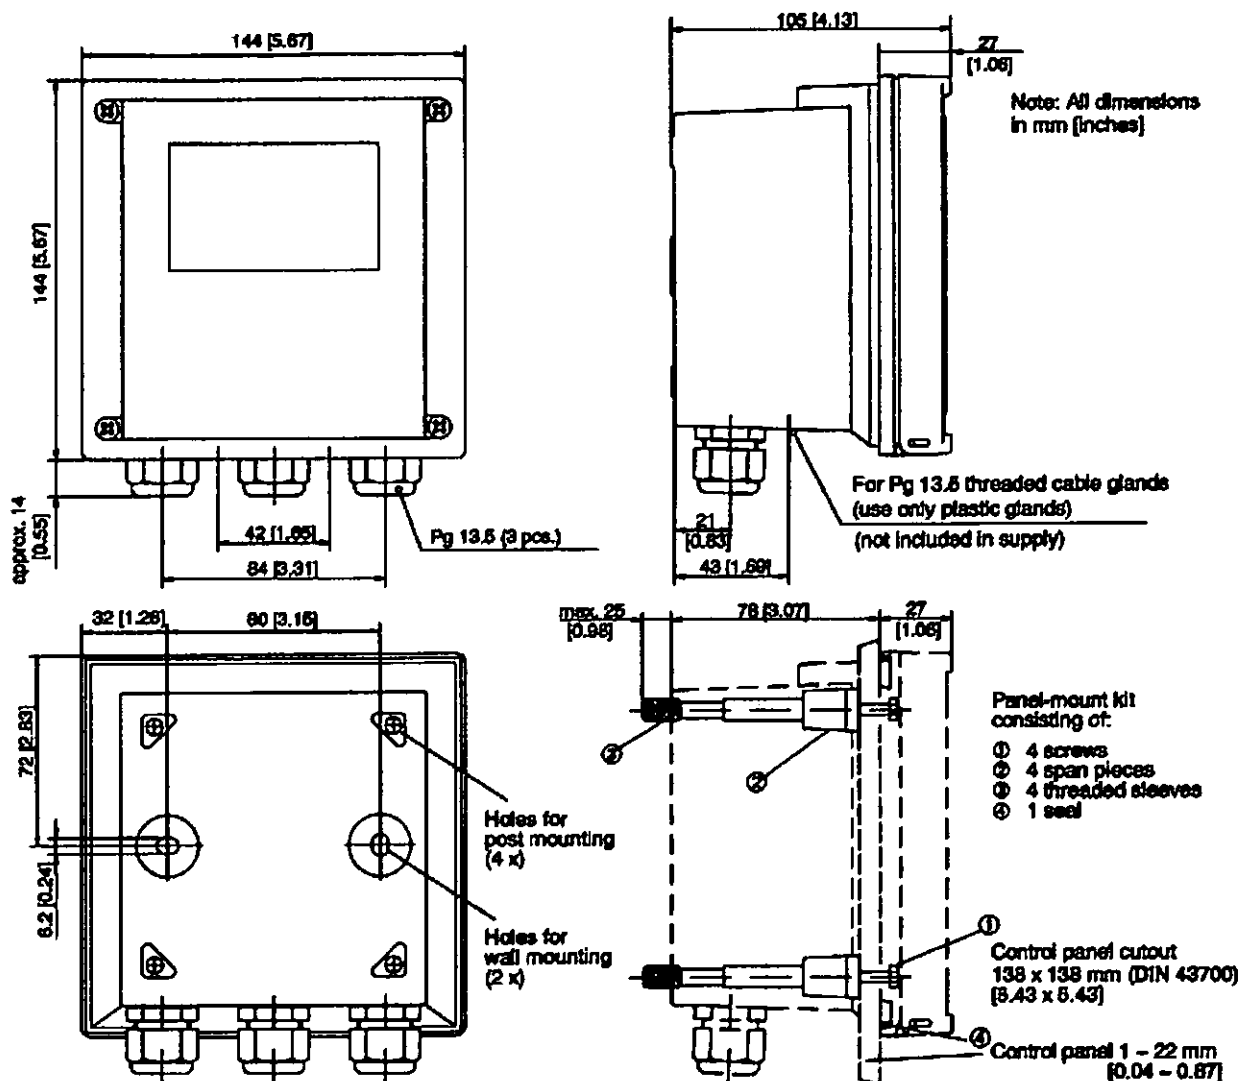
Dimension Drawing for APT4000 and P/N 51205990-001 Panel Mounting Kit
